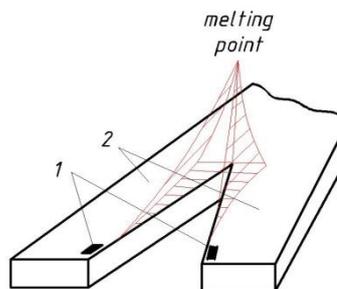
Scheme of the process of high-frequency pressure welding with reflow:
